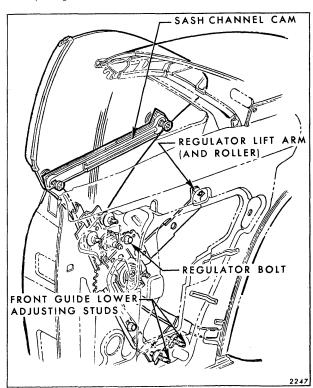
Rear Quarter Window Removal "A-17 and 67" Styles
